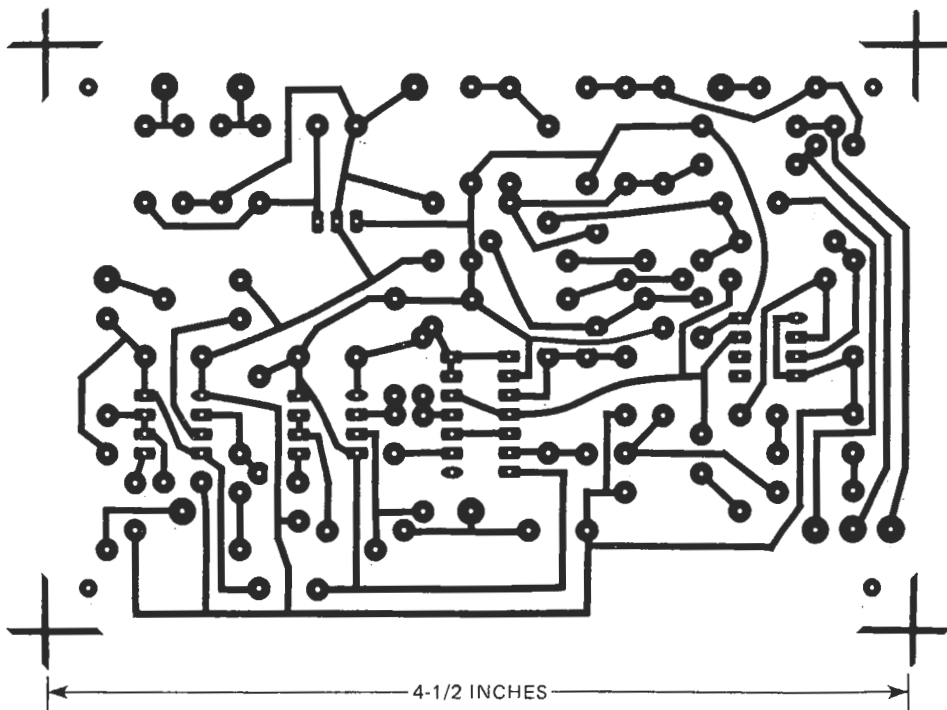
THE SINGLE-SIDED BOARD is small enough to fit inside many oscilloscopes.
